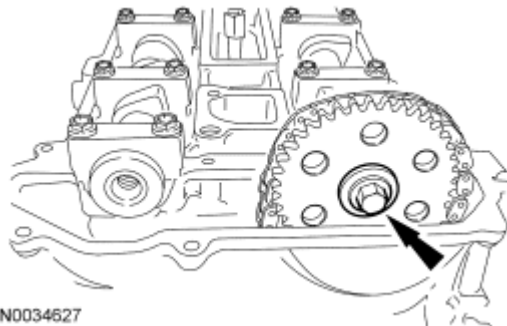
Locating Intake Camshaft Drive Gear Bolt
